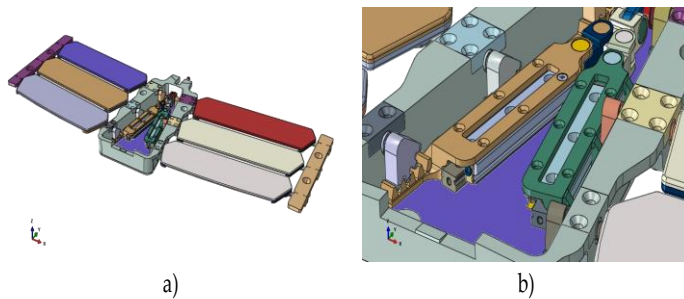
(a) configuration #2; (b) details on crankcase and joints.
